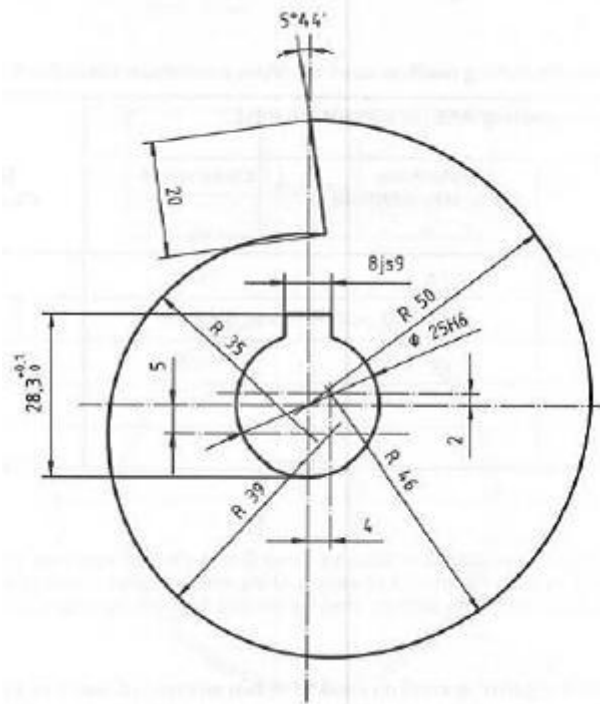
c) – Tapping machine – Details of item No. 9 in Figure 1
